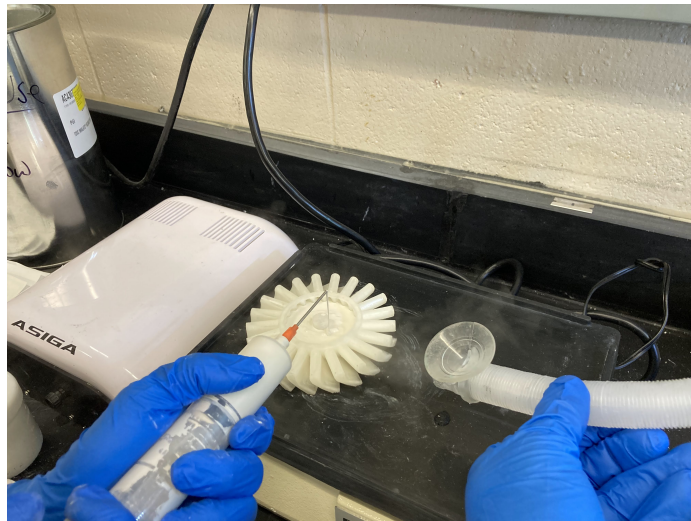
Casting of the turbine mold utilizing a syringe, vibrating table, and humidifier.
